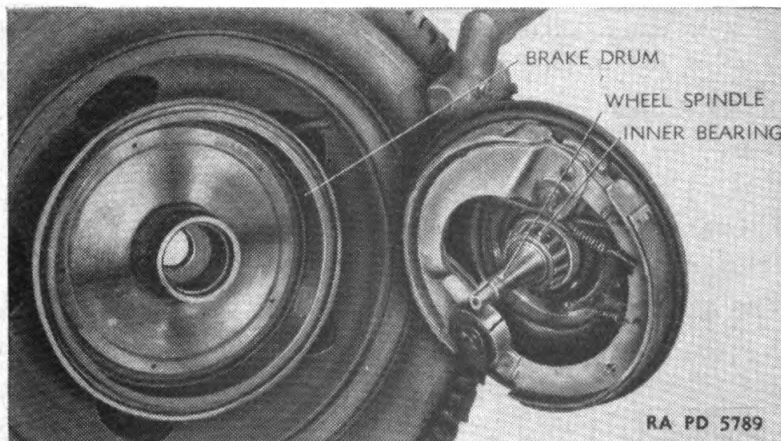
Wheel and brake drum removed from brake assembly.
